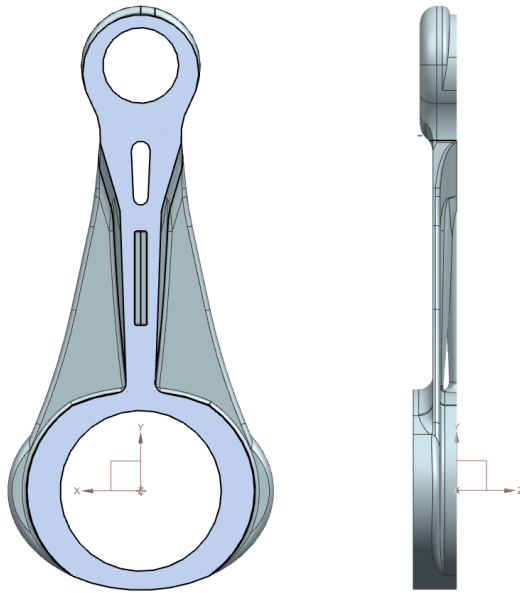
Cross-sections of 2.1 beam about Z-axis; Center cut.
